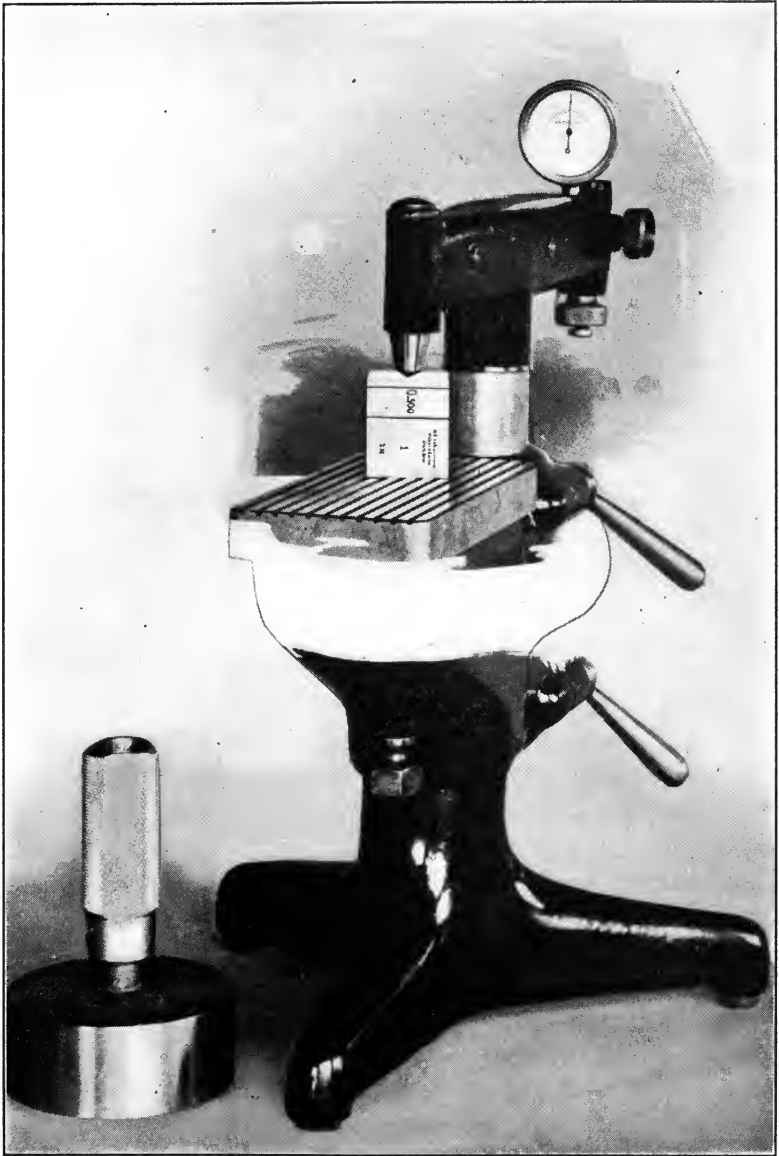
American Amplifying Gage Used with Swedish Gage Blocks
